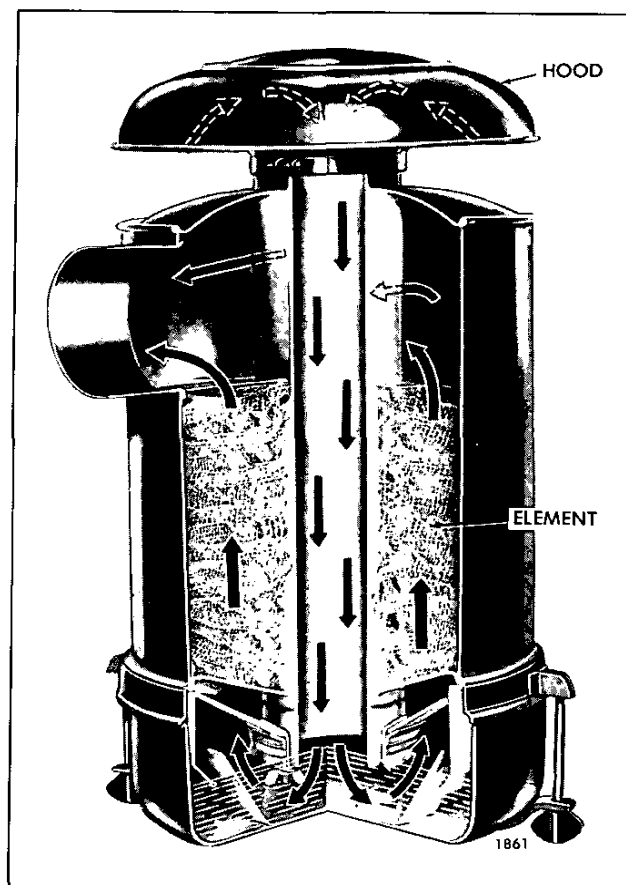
Heavy Duty Oil Bath Type Air Cleaner
